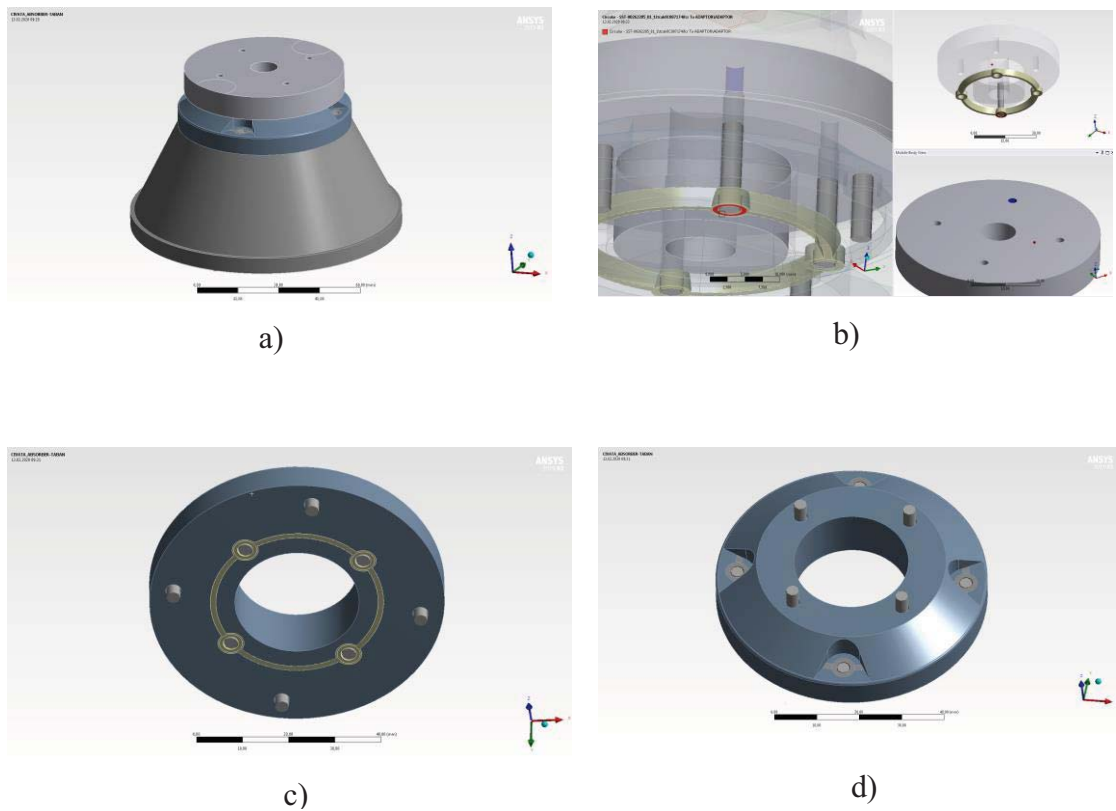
The connection of the isolator: a) The assembly view; b) connection faces; c) bottom view; d) top view
